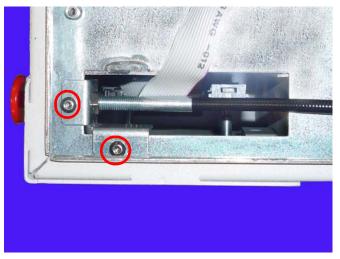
Remove the two screws that secure the manual override cable to the frame
